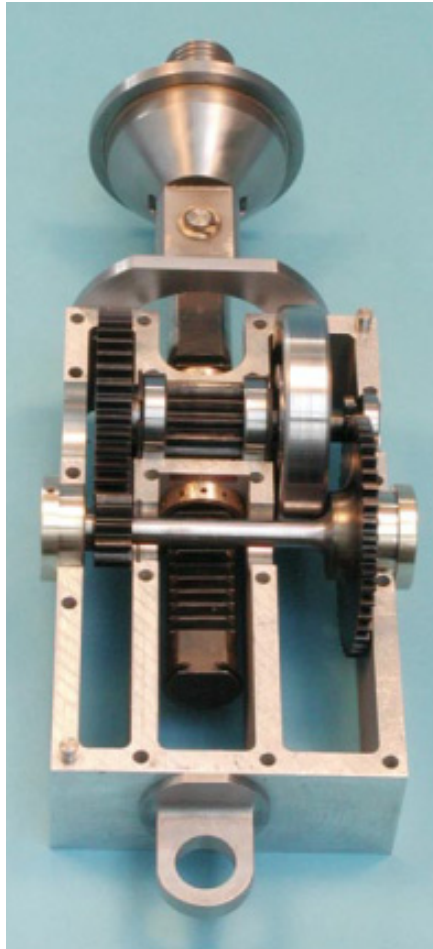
Rack and pinion type mechanical inerter prototype developed in Cambridge University Engineering Department[4]
